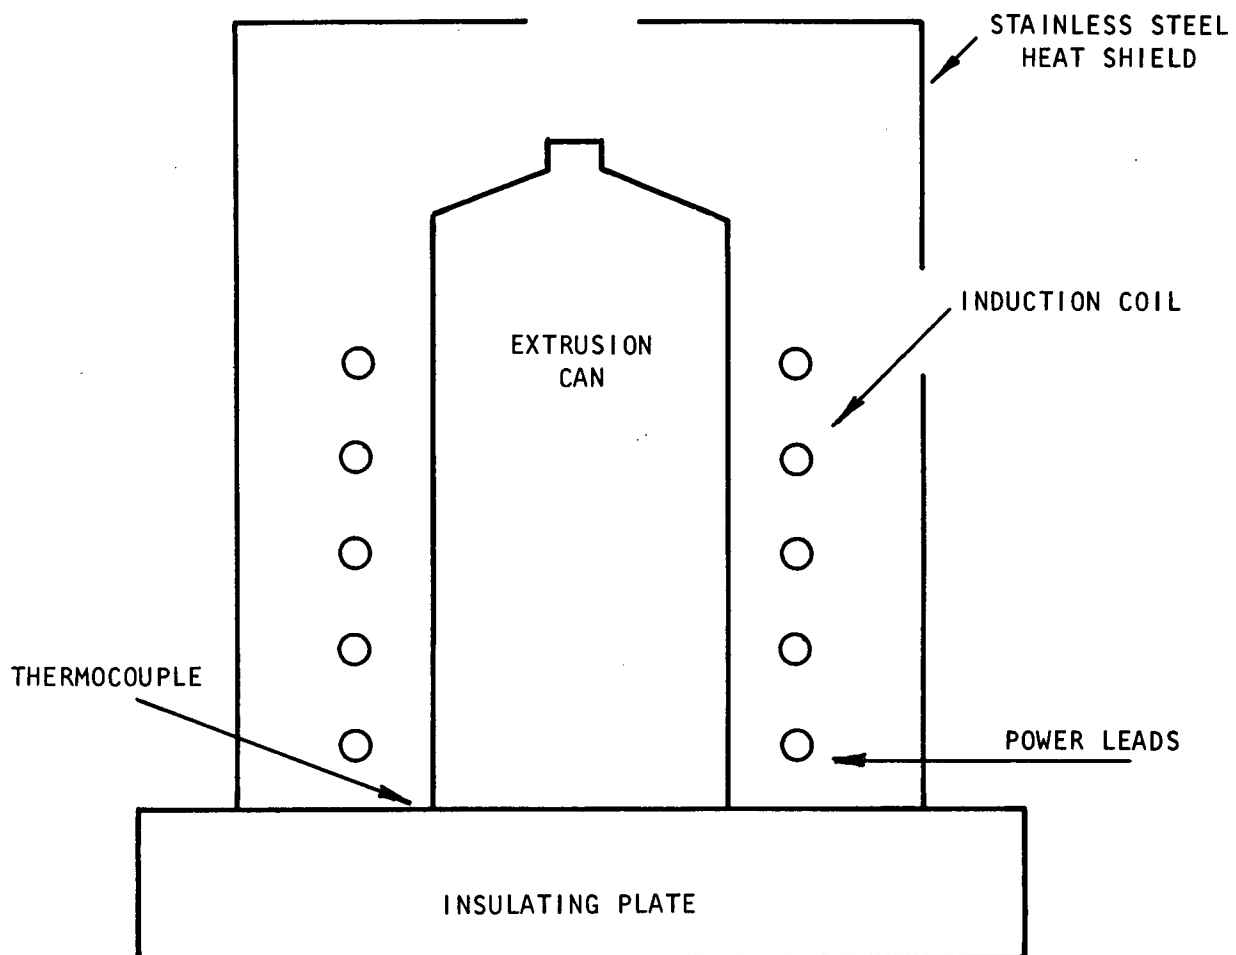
Schematic illustration of apparatus inside electron beam welding chamber for vacuum washing extrusion billets.
